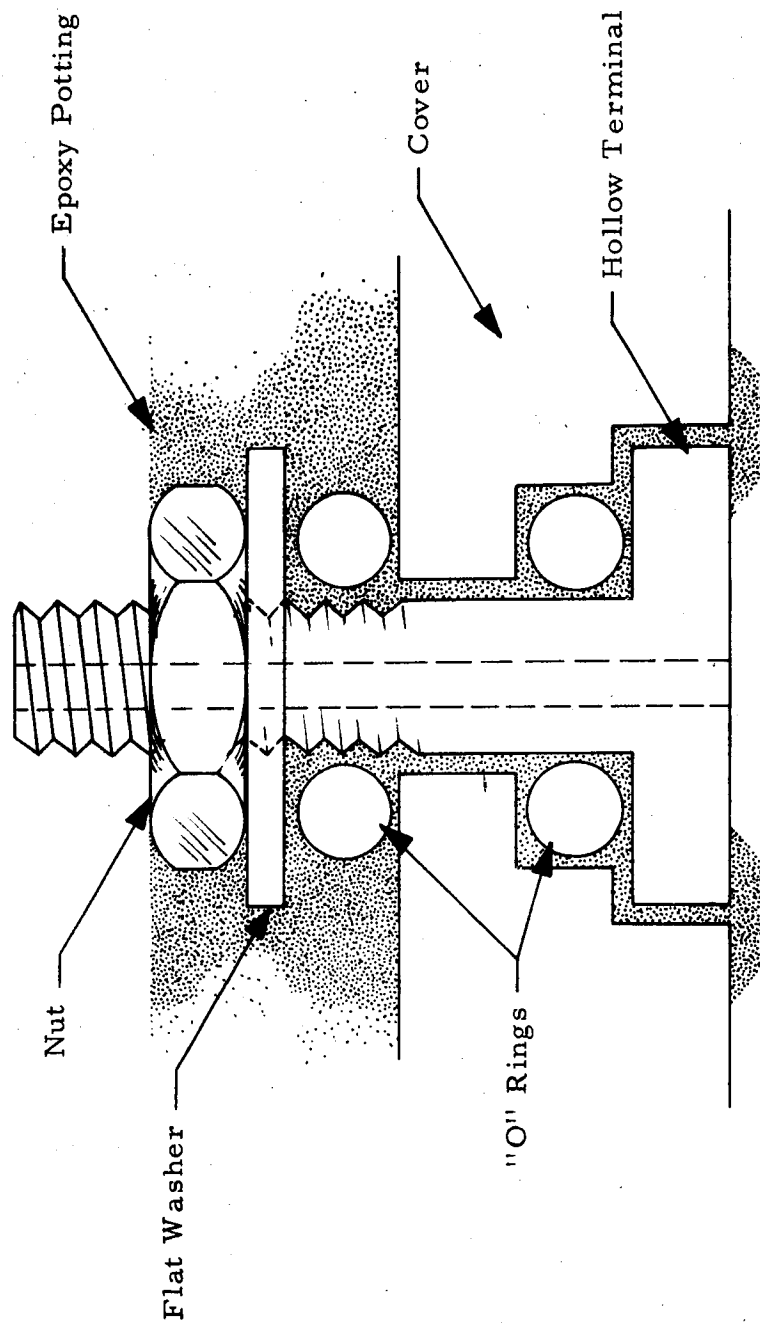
Terminal-to-Cover Seal Assembly - Model #2
